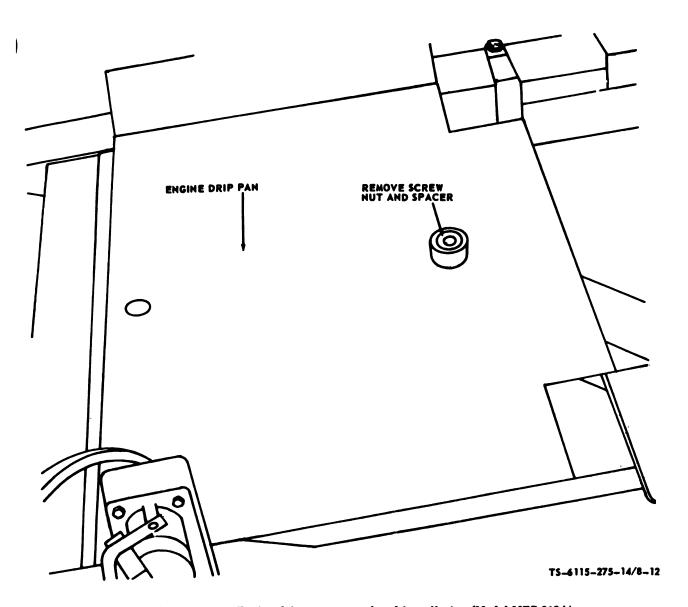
Engine drip pan, removal and installation (Model MEP-018A).
